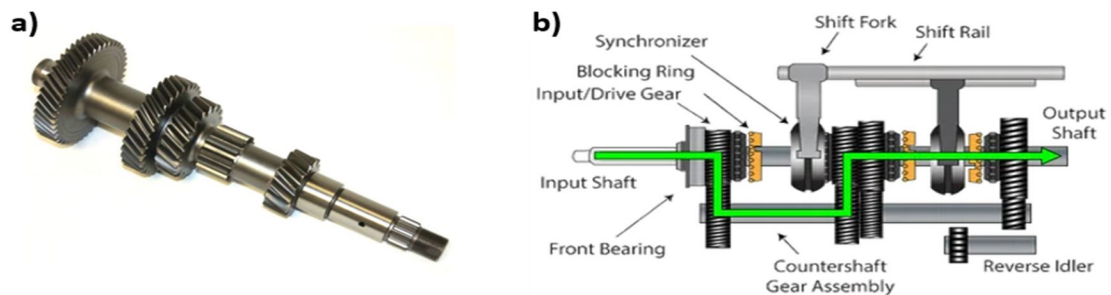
a) Cluster gear shaft b) Cluster gear shaft assembly
